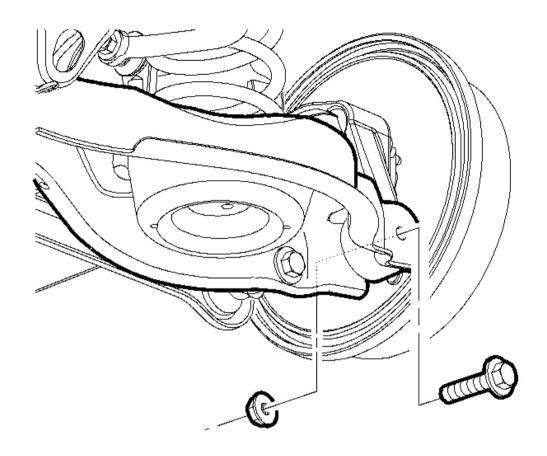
Lower Control Arm, Knuckle Bolt & Nut Courtesy of GENERAL MOTORS CORP.
